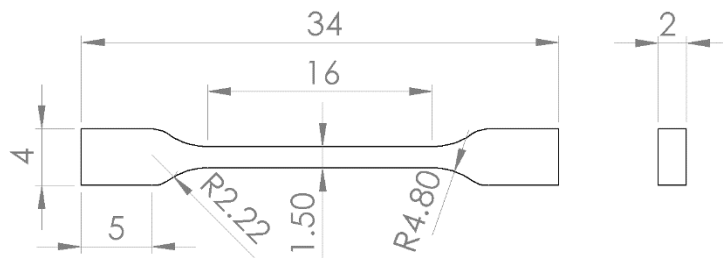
Dimension of dogbones used for mechanical testing. Units are in mm.
